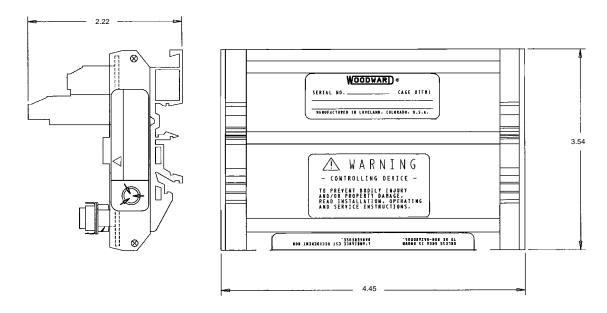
Four Channel Actuator Driver FTM Outline Dimensions
